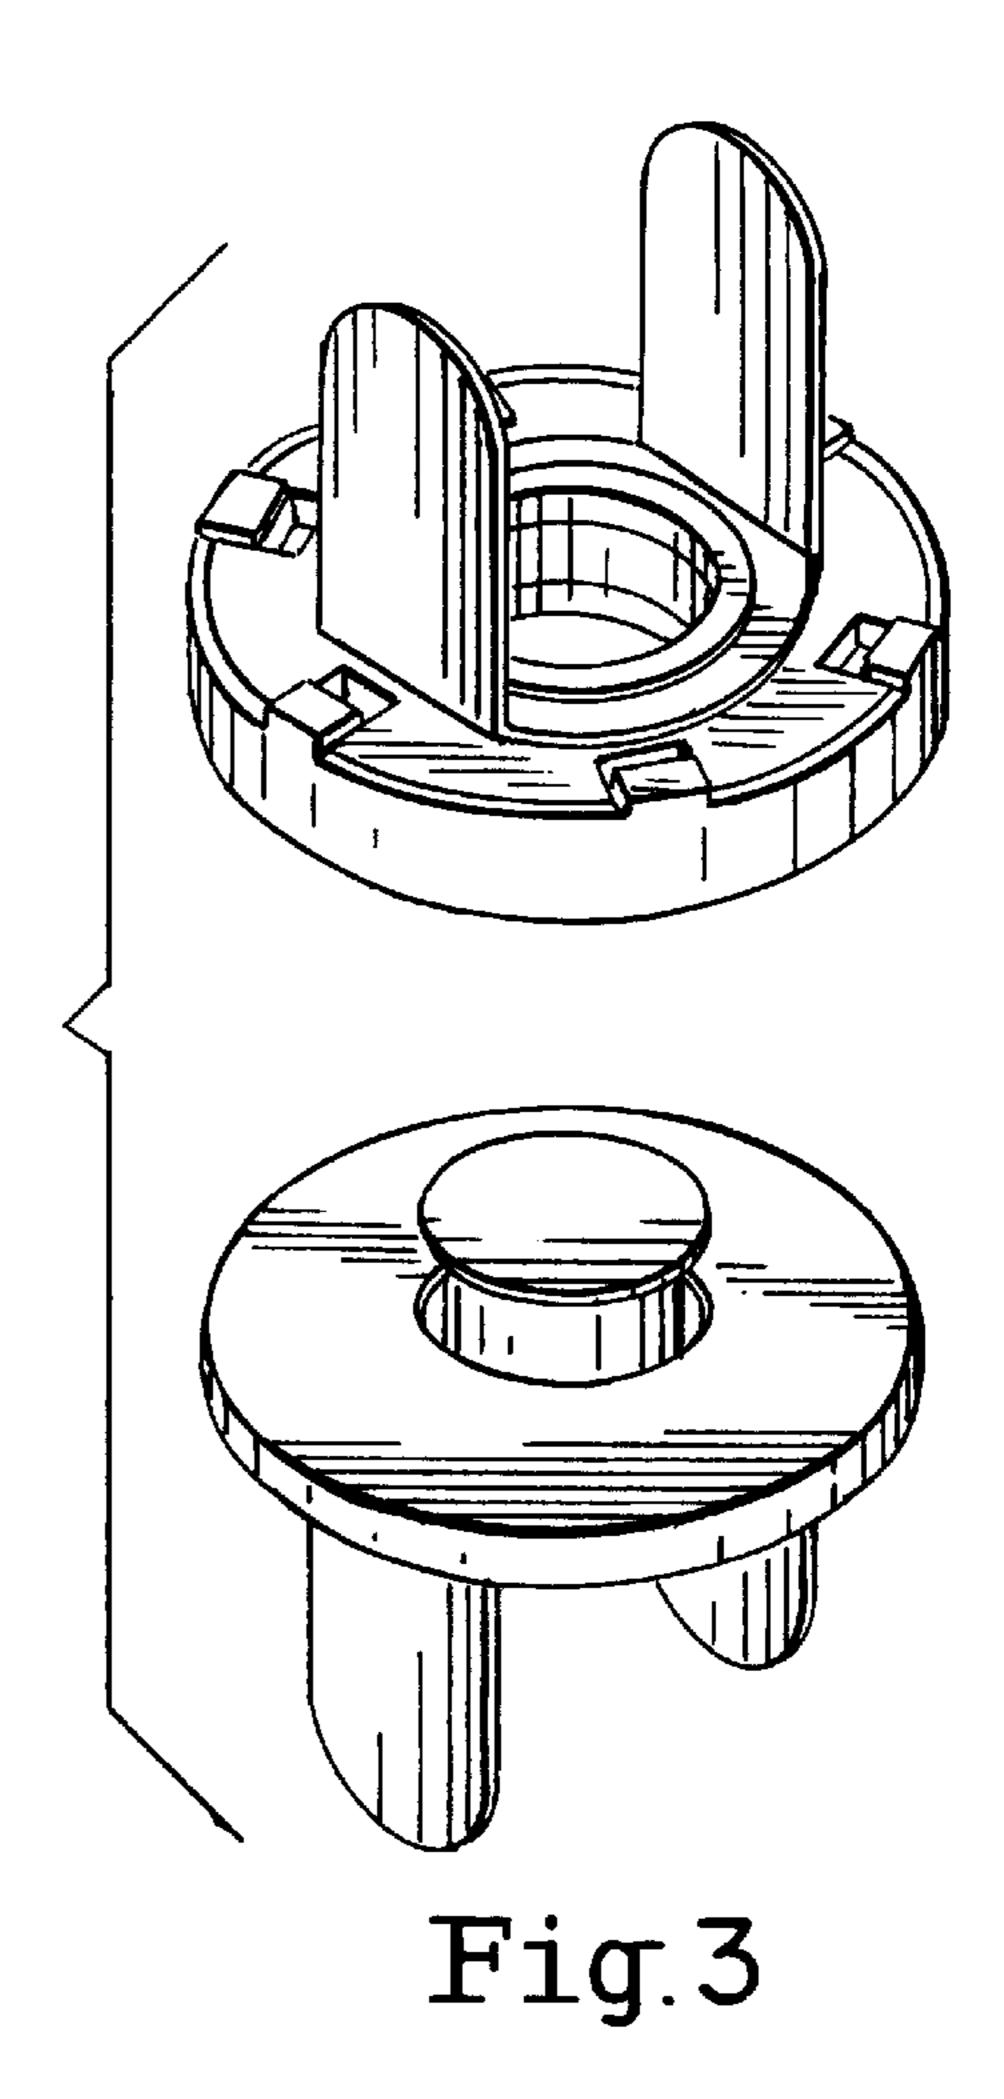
is a top isometric view of the male fastener and the female fastener of an exploded magnetic fastener unit in their separated or detached position with the female member overlying the male fastener member; and,
